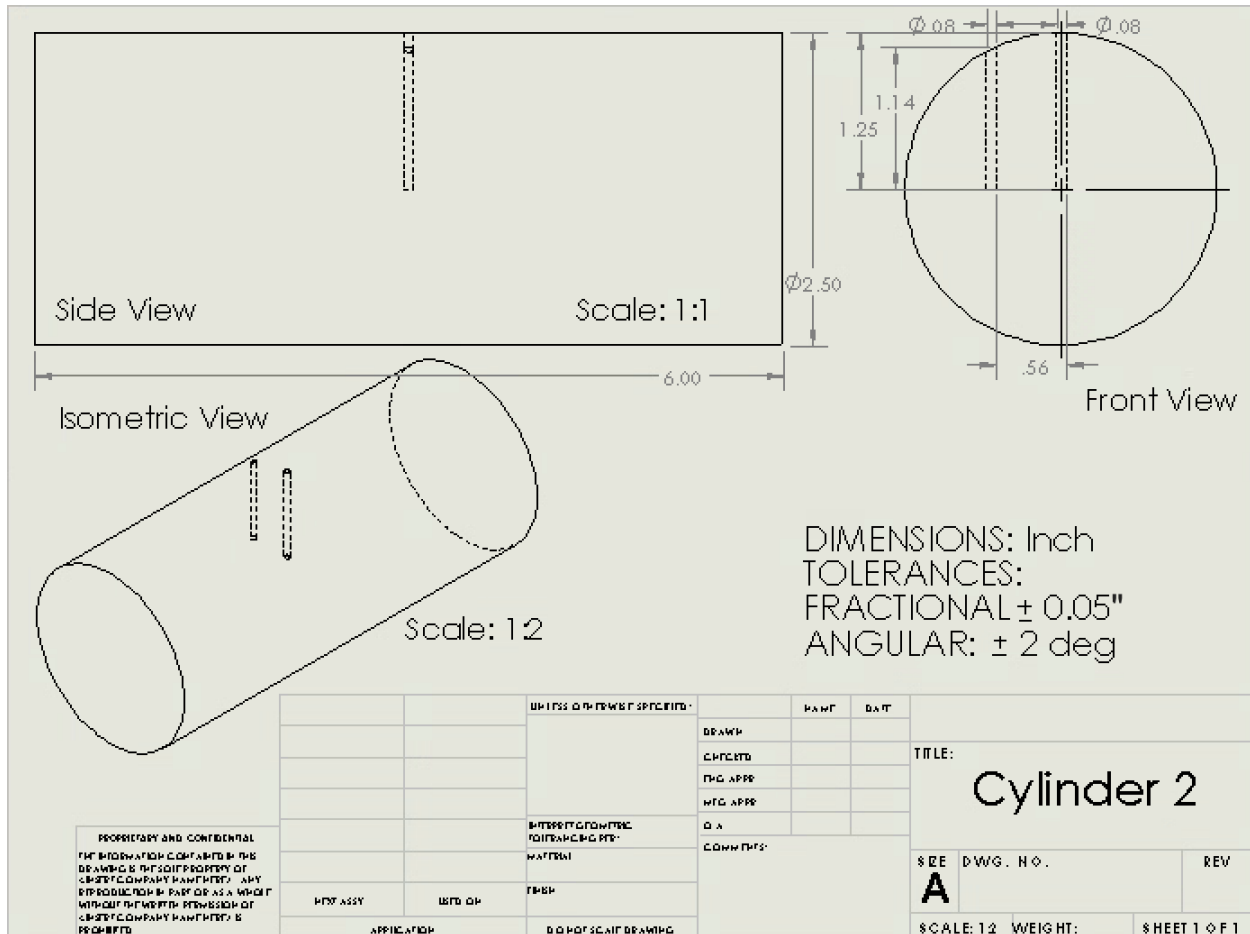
Drawing of Cylinder 2 to be manufactured. Cylinder 1 is the same except for it only has one drilled hole to the center.
